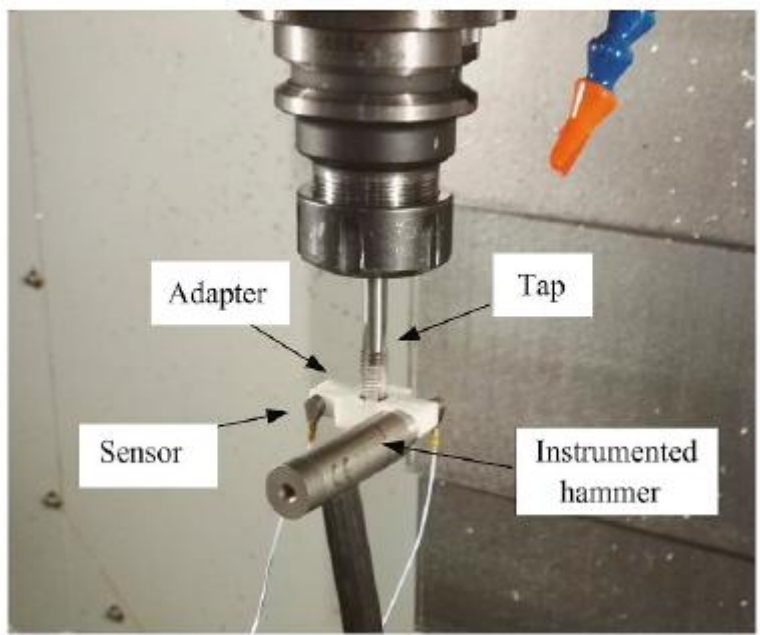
Experimental tap test setup using a 3D printed adapter (Zhang, 2019)
